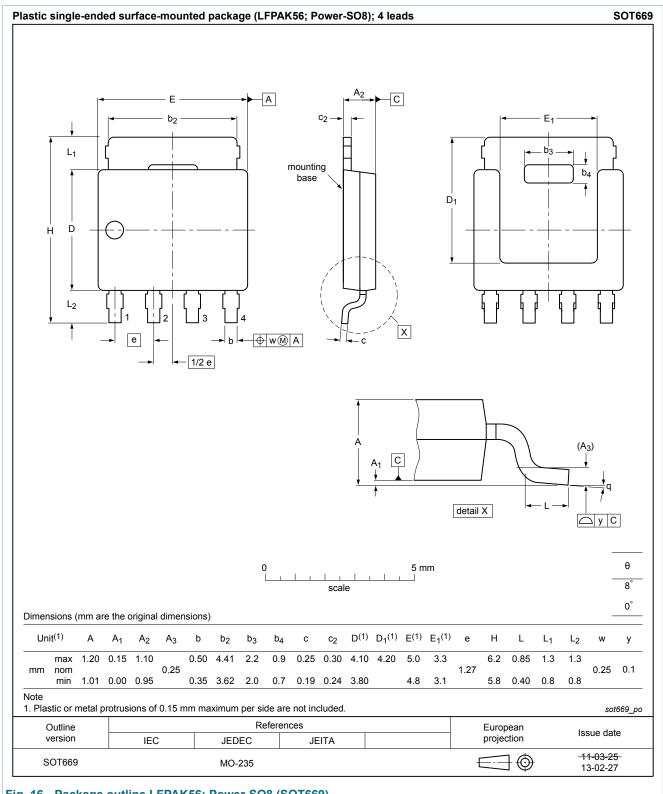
Package outline LFPAK56; Power-SO8 (SOT669)
